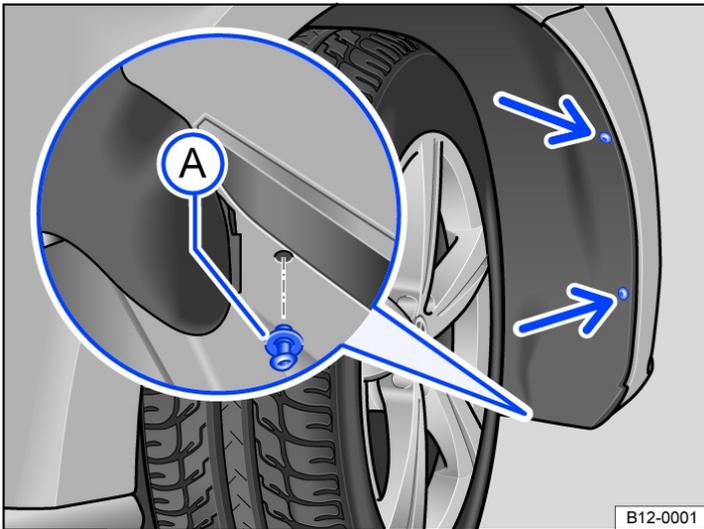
In the front right wheel housing: unscrewing securing screws (arrows) and removing spreader rivet (A).
